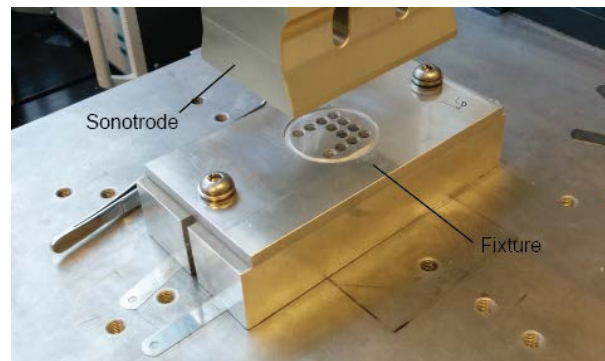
Photograph of the fixture for the ultrasonic welder.
